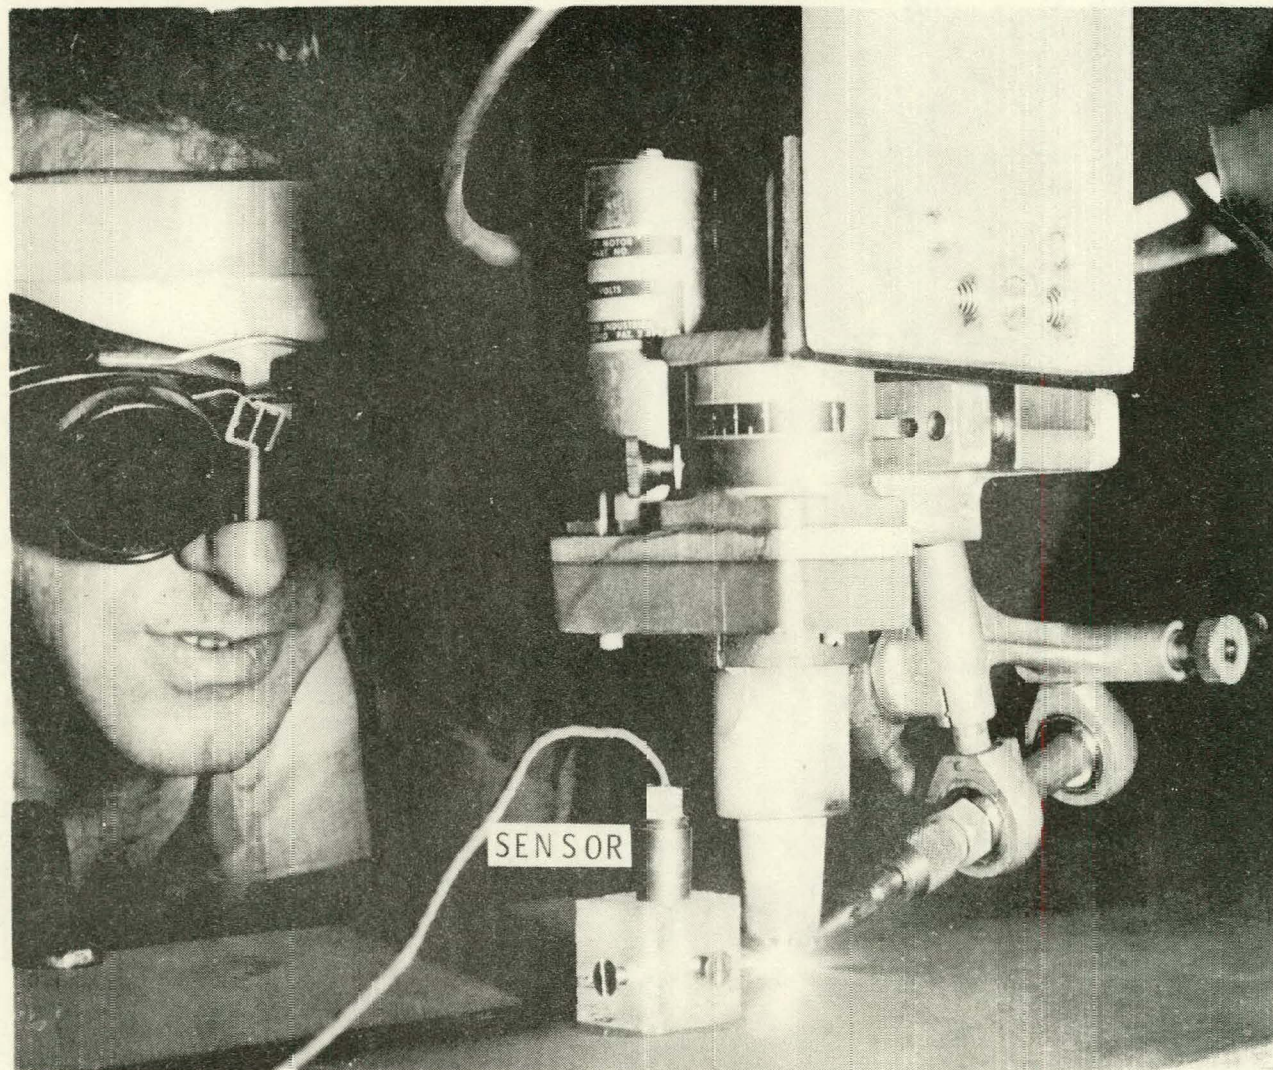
Welding Set-Up Illustrating the Location of the Acoustic Emissions Sensor.
